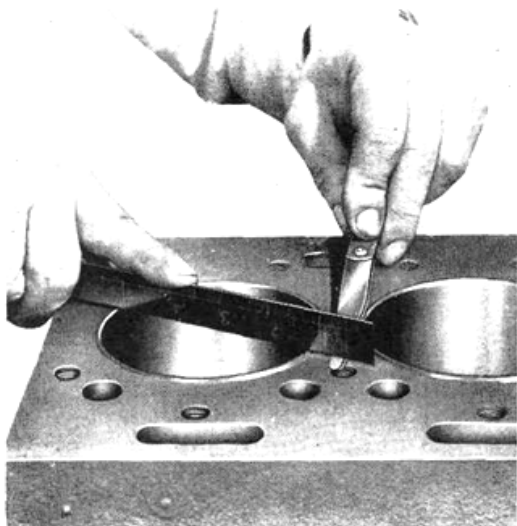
Checking Cylinder Liner Protrusion above Cylinder Block Top Face
